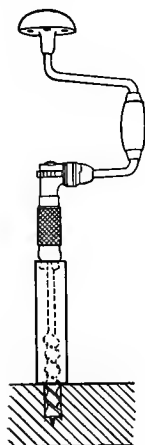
A Mail- ing-Tube Depth-Gauge for Boring Holes.
